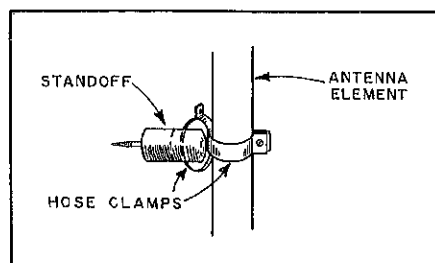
Suggested method of mounting radiator element without drilling holes in aluminum tubing.
